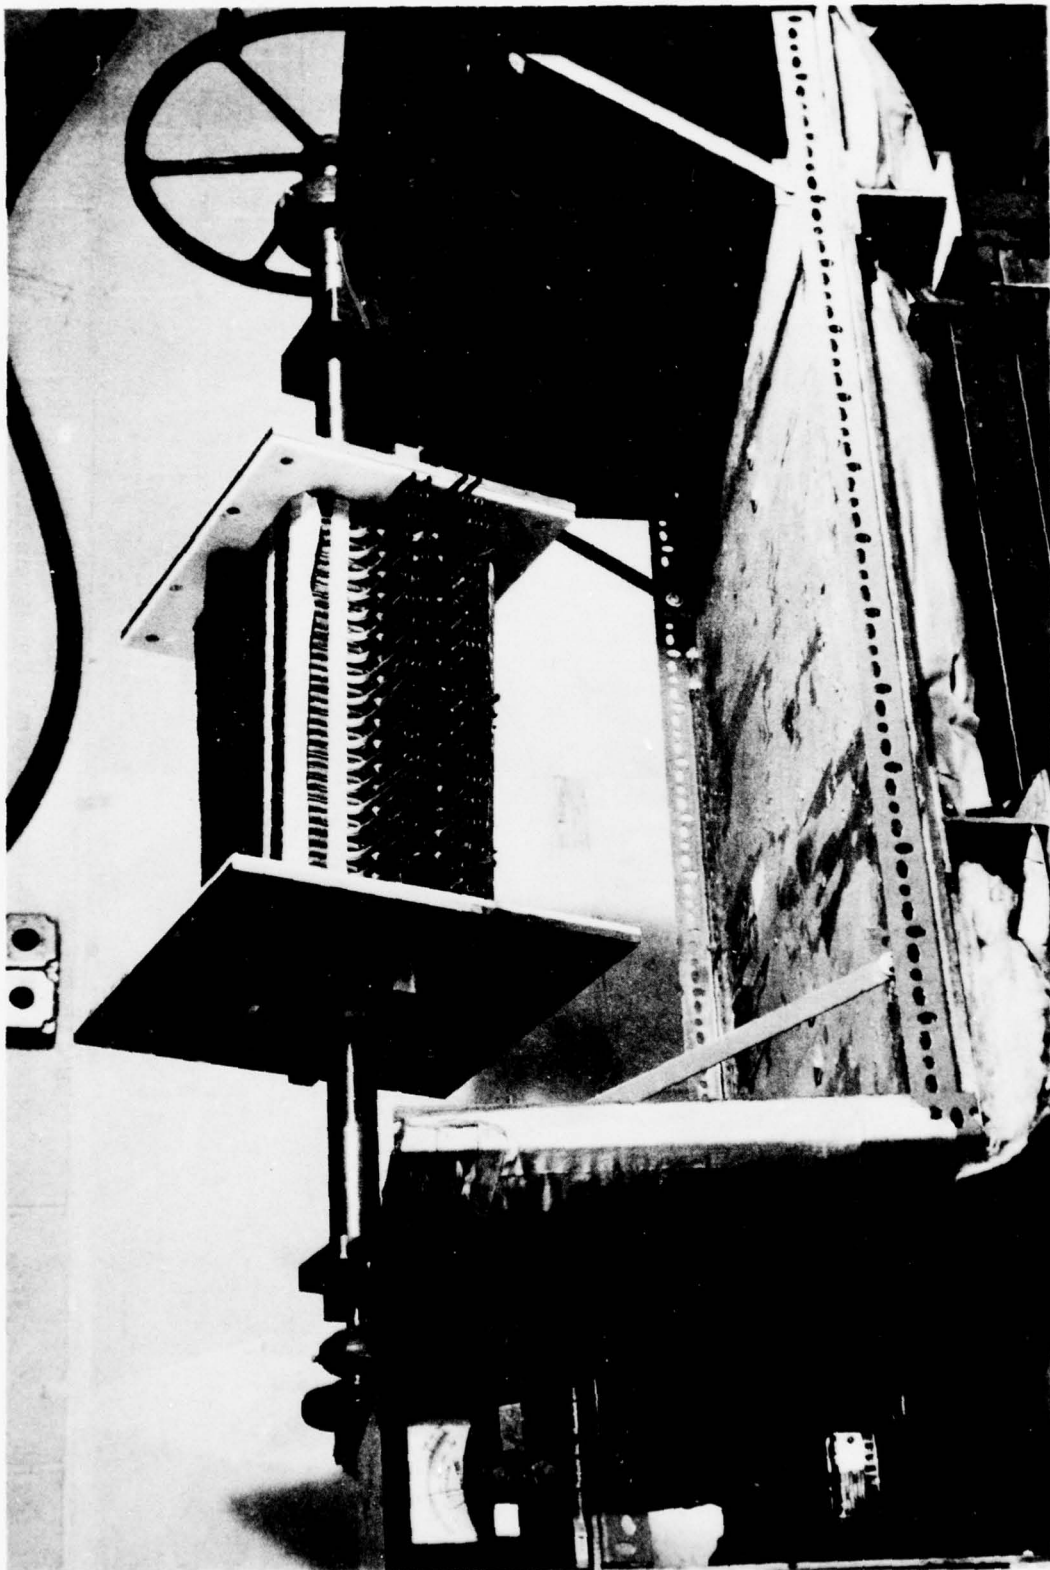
Diagnostics Channel Mounted in Winding Fixture.
